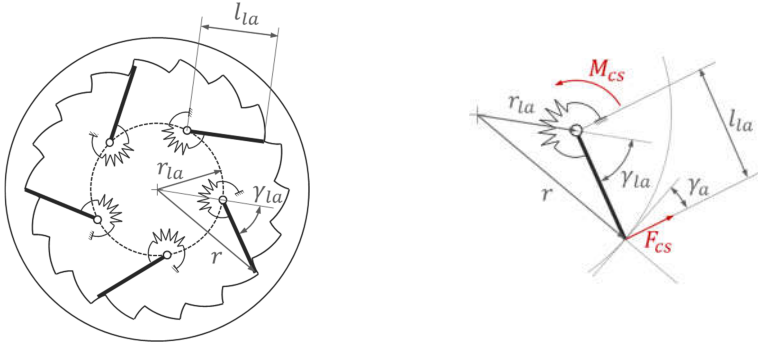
Parameters describing the integration of the Brake Springs into the overall brake assembly.
